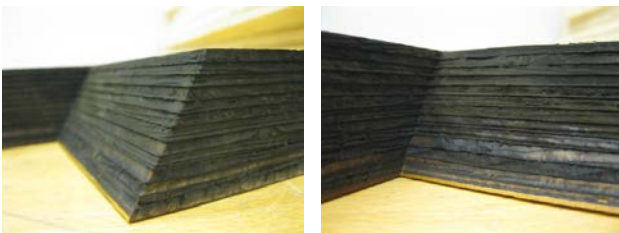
5-axis 30° inclined laser cut of a convex (left) and concave (right) corner on 13-layer 39mm spruce LVL plates.
